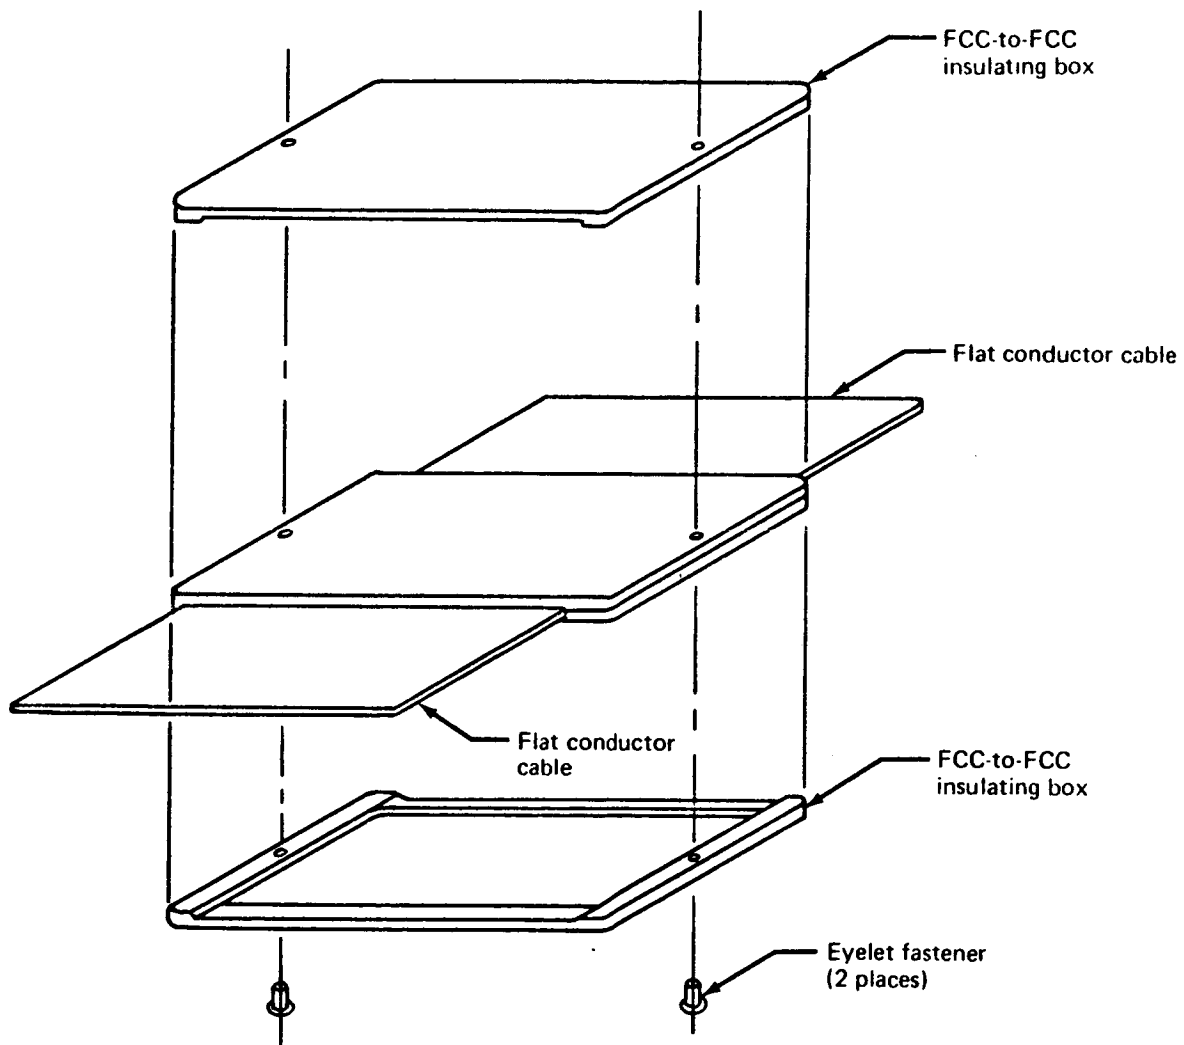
EXPLODED VIEW OF COMPONENTS—FCC TO FCC
